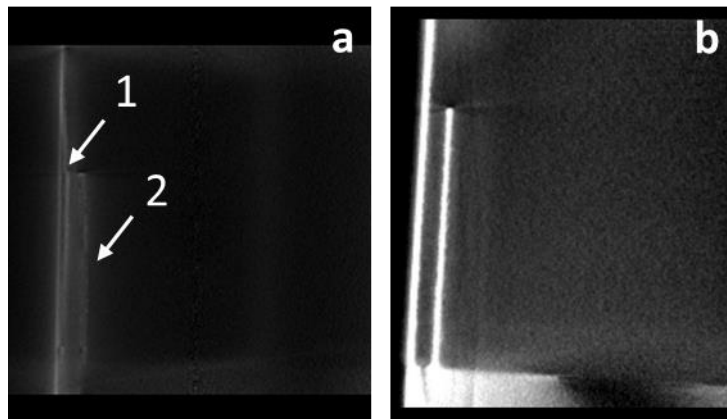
CT Scan of Beam Blocker Made through Additive Manufacturing
